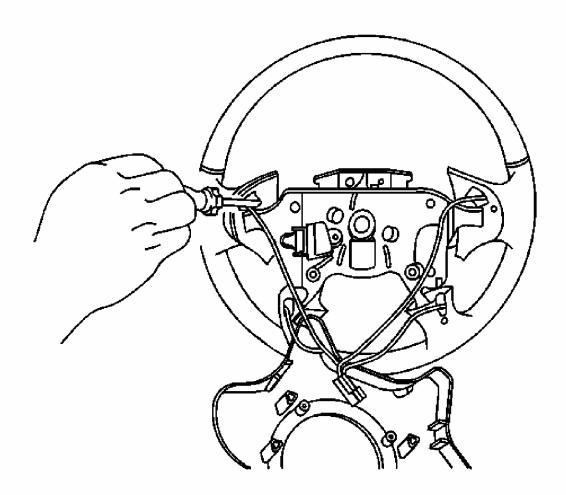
Removing Switch From Steering Wheel With Small Blunt Ended Tool Courtesy of GENERAL MOTORS CORP.
